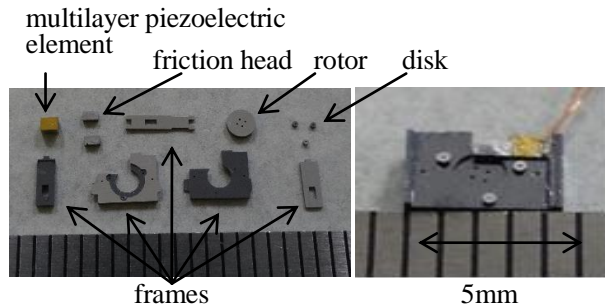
Fabricated components and the assembled friction drive MEMS rotary actuator
